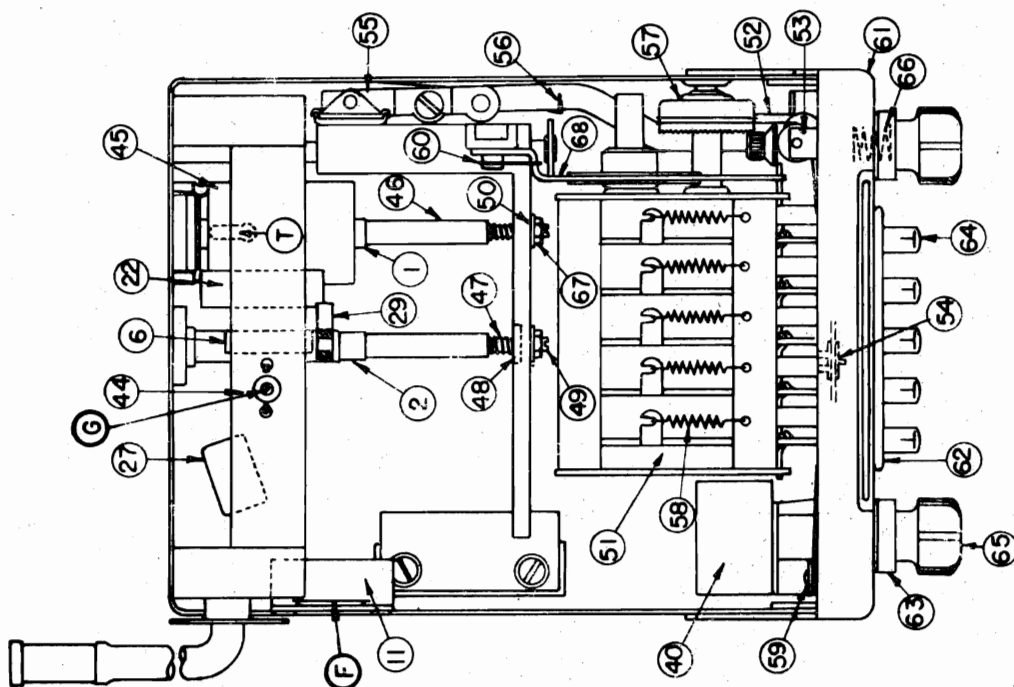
PARTS LAYOUT--TUNER ASSEMBLY
